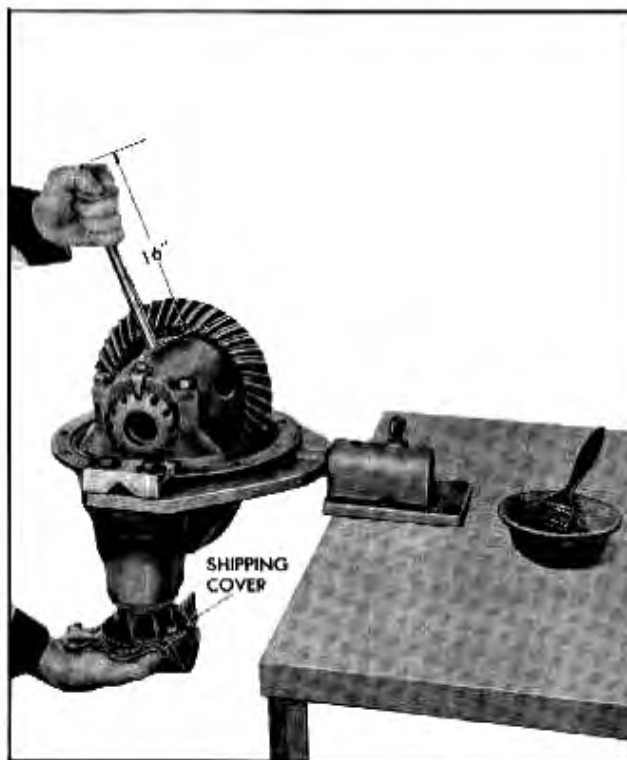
Checking Tooth Contact Pattern—Red Lead Test
